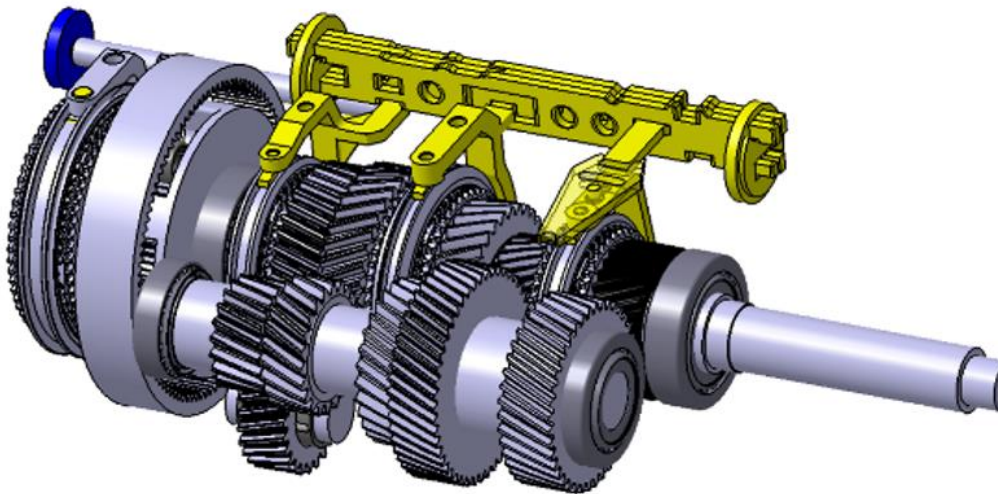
8+1 MT 3D rough sizing using KissSys, courtesy of the Company
